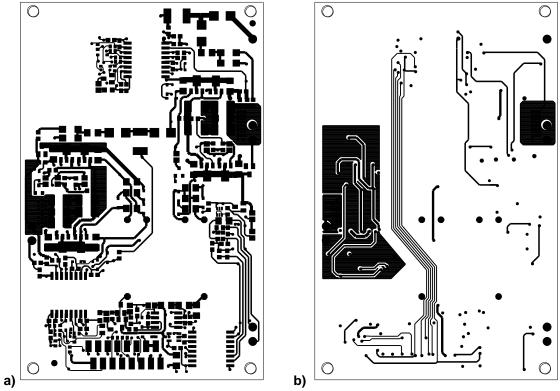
EconoDUAL<sup>™</sup> 3 IGBT driver – a) Top layer and b) Layer 2
